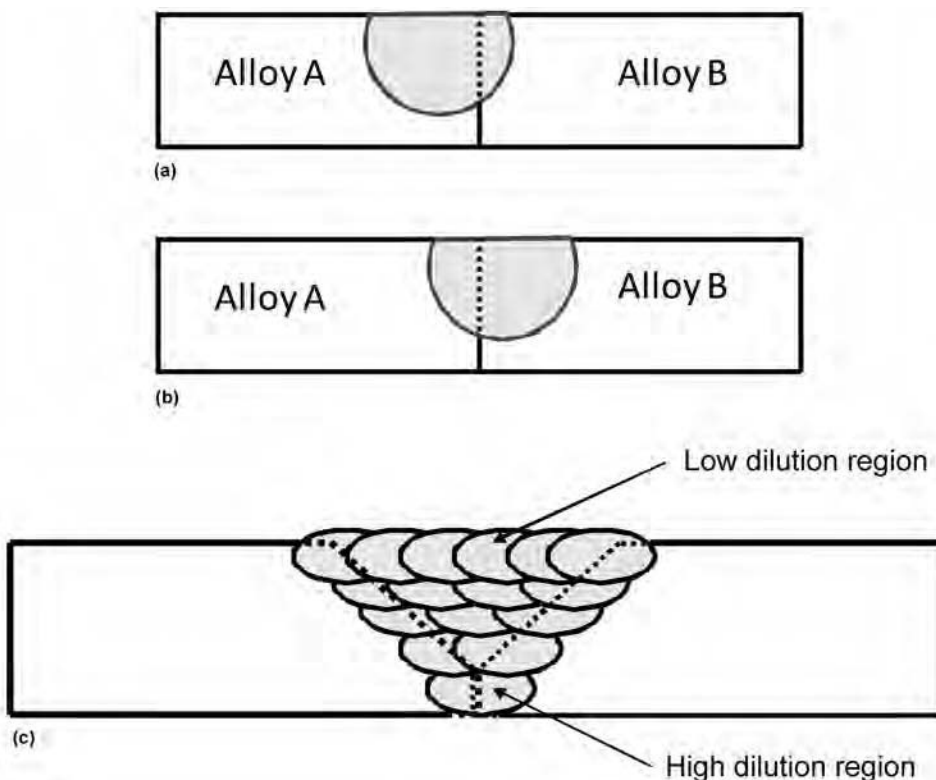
Example of additional factors that can affect dilution. (a) and (b) Placement of the heat source relative to seam in a square butt weld. (c) Variation in dilution in a multipass butt weld
